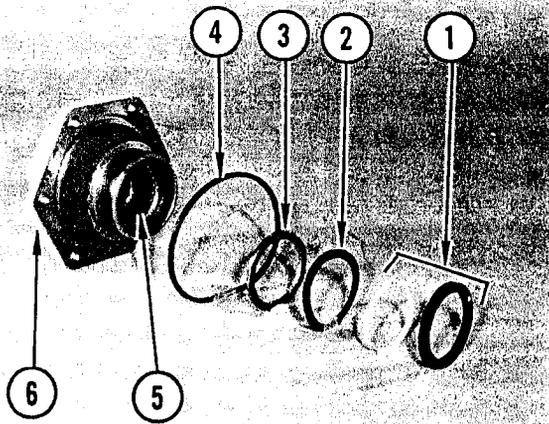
EXPLODED VIEW OF COVER ASSEMBLY
